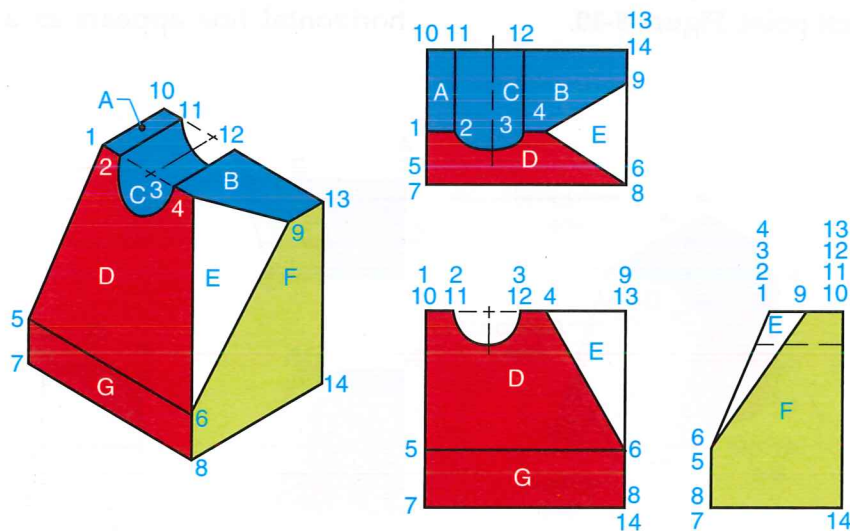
Plane surfaces appear differently in each projection of a drawing.
